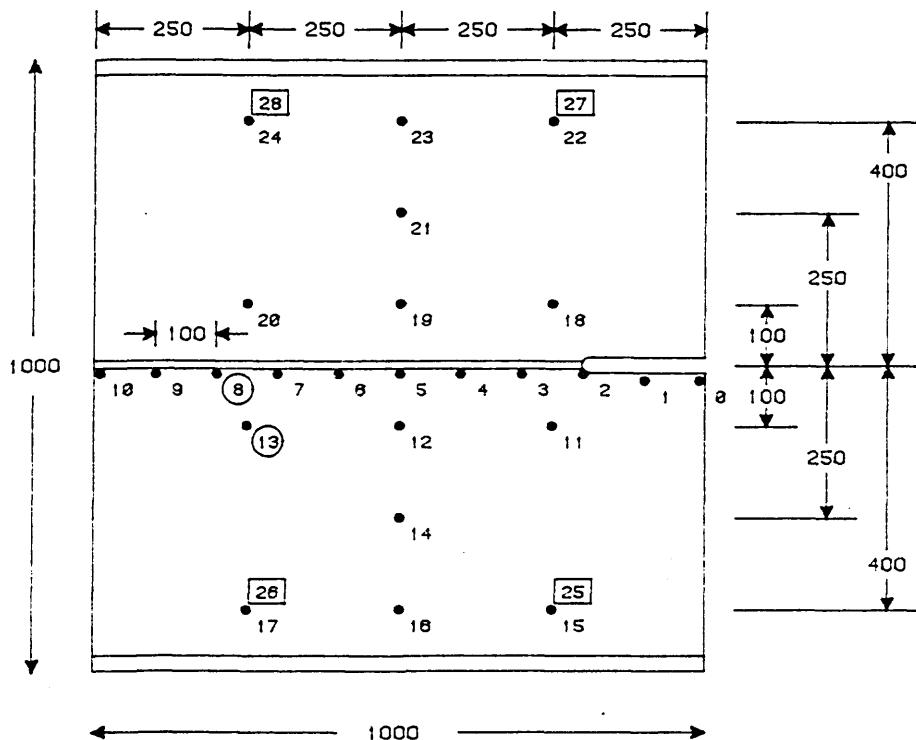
Positions of thermocouples on wide plate test specimen. All dimensions are in millimeters.
